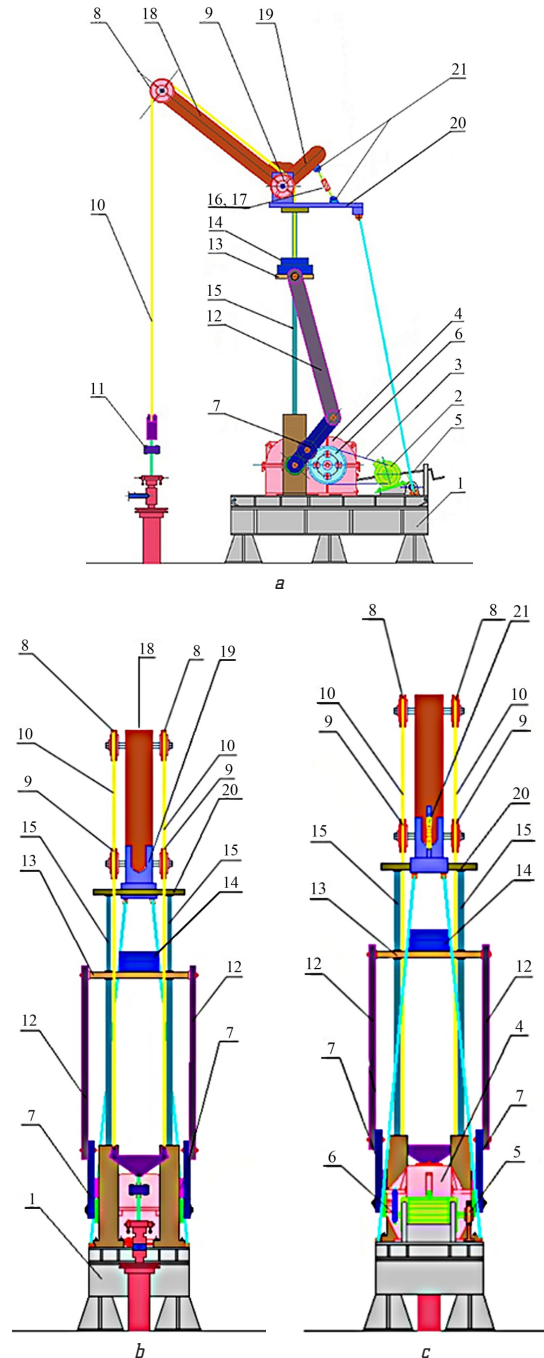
New constructive solution of beamless pumping unit: a – side view; b – front view; c – rear view
